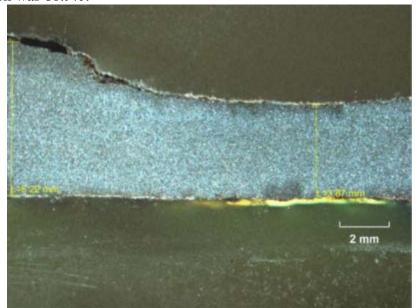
Cross Section of Coupon 2 at area of Maximum Wall Loss
